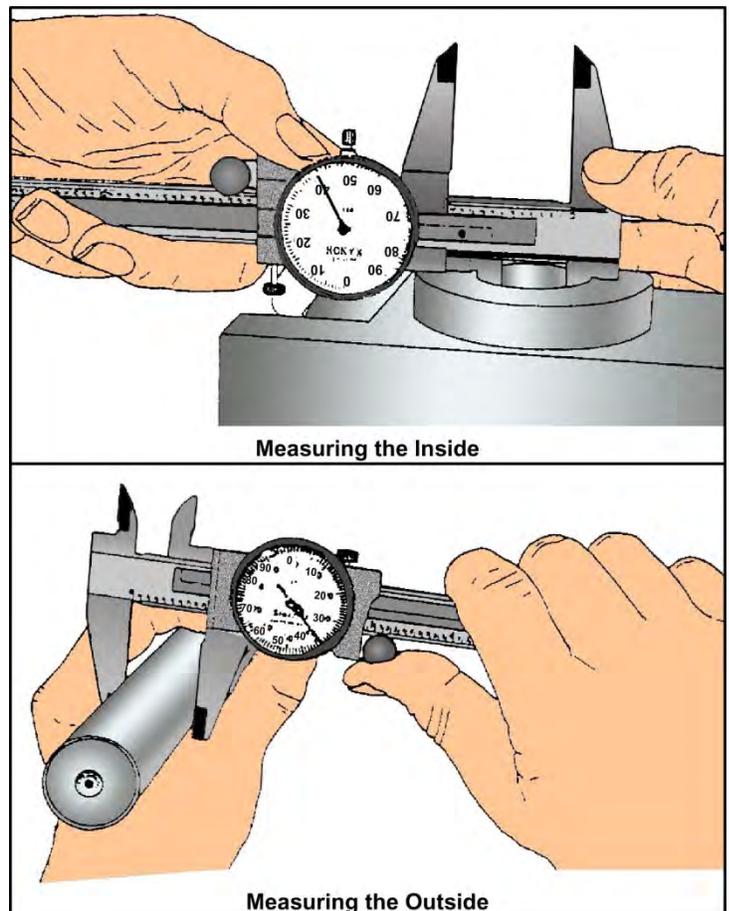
Measuring inside and outside diameters with a dial/vernier caliper.
